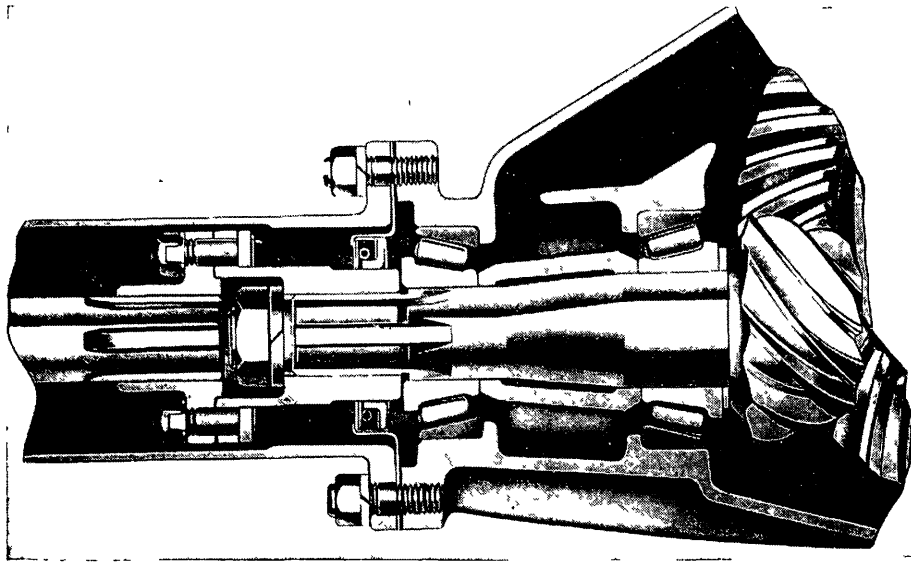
1949-52 Ambassador. Connection between rear axle and propeller shaft
